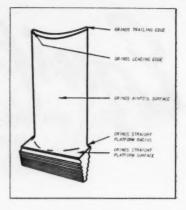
Diagram of turbo-jet blade indicating five surfaces ground in one operation on machine shown in Fig. 1
